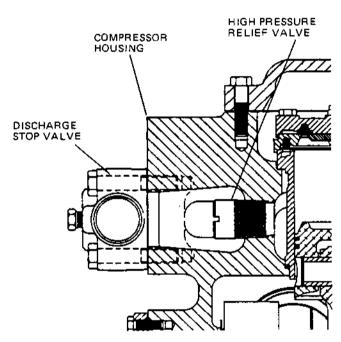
LOCATION OF HIGH PRESSURE RELIEF VALVE — 6 CYLINDER COMPRESSOR SHOWN
